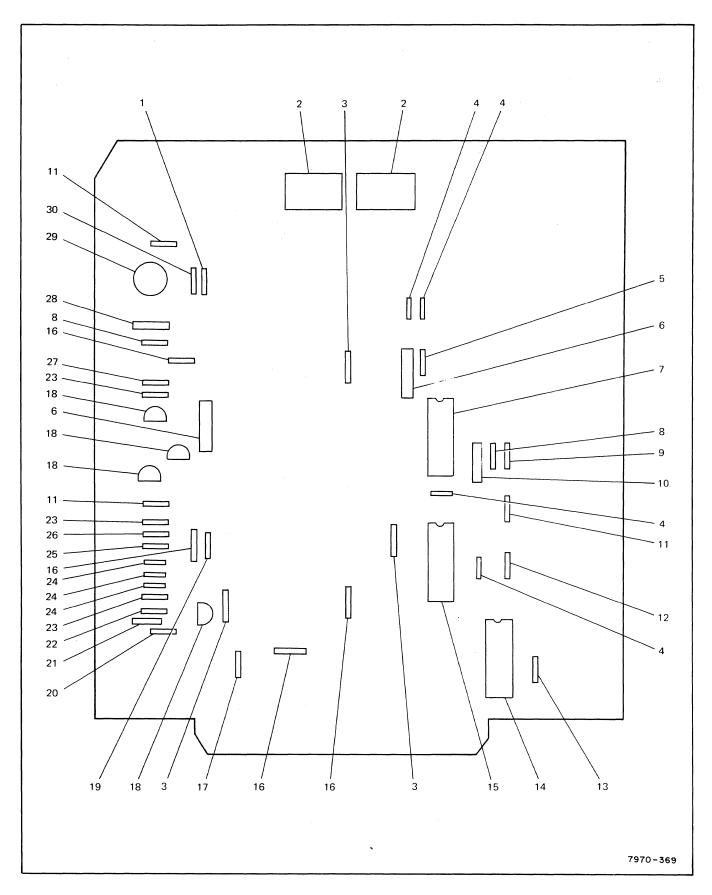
Single-Channel Read Data PC Assembly (10 - 20.9 ips)
